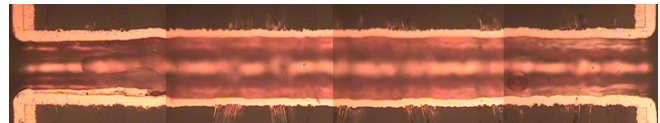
Cross Section of 0.25 mm Through Hole in 1.6 mm Panel Plated at 15 ASF
